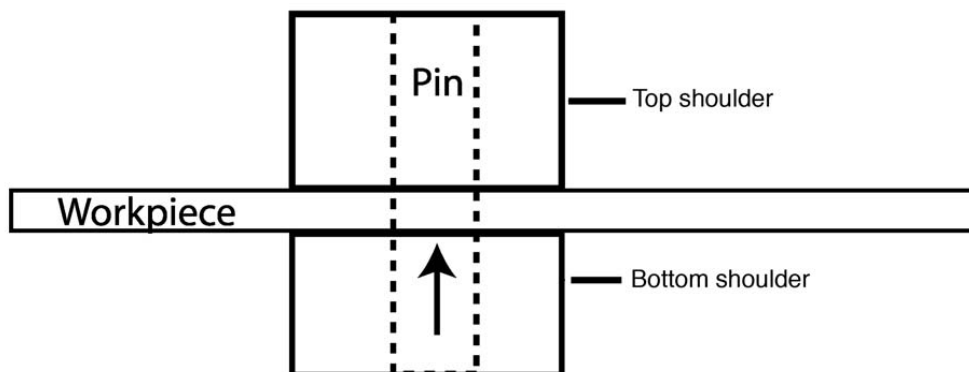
Frictional heat is created between the shoulder and the workpiece.
